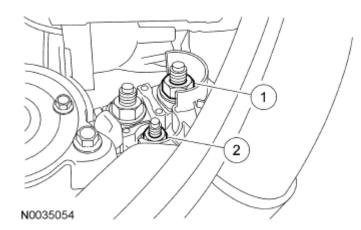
Identifying Battery Cable Nut And Starter Solenoid Terminal Nut Courtesy of FORD MOTOR CO.
